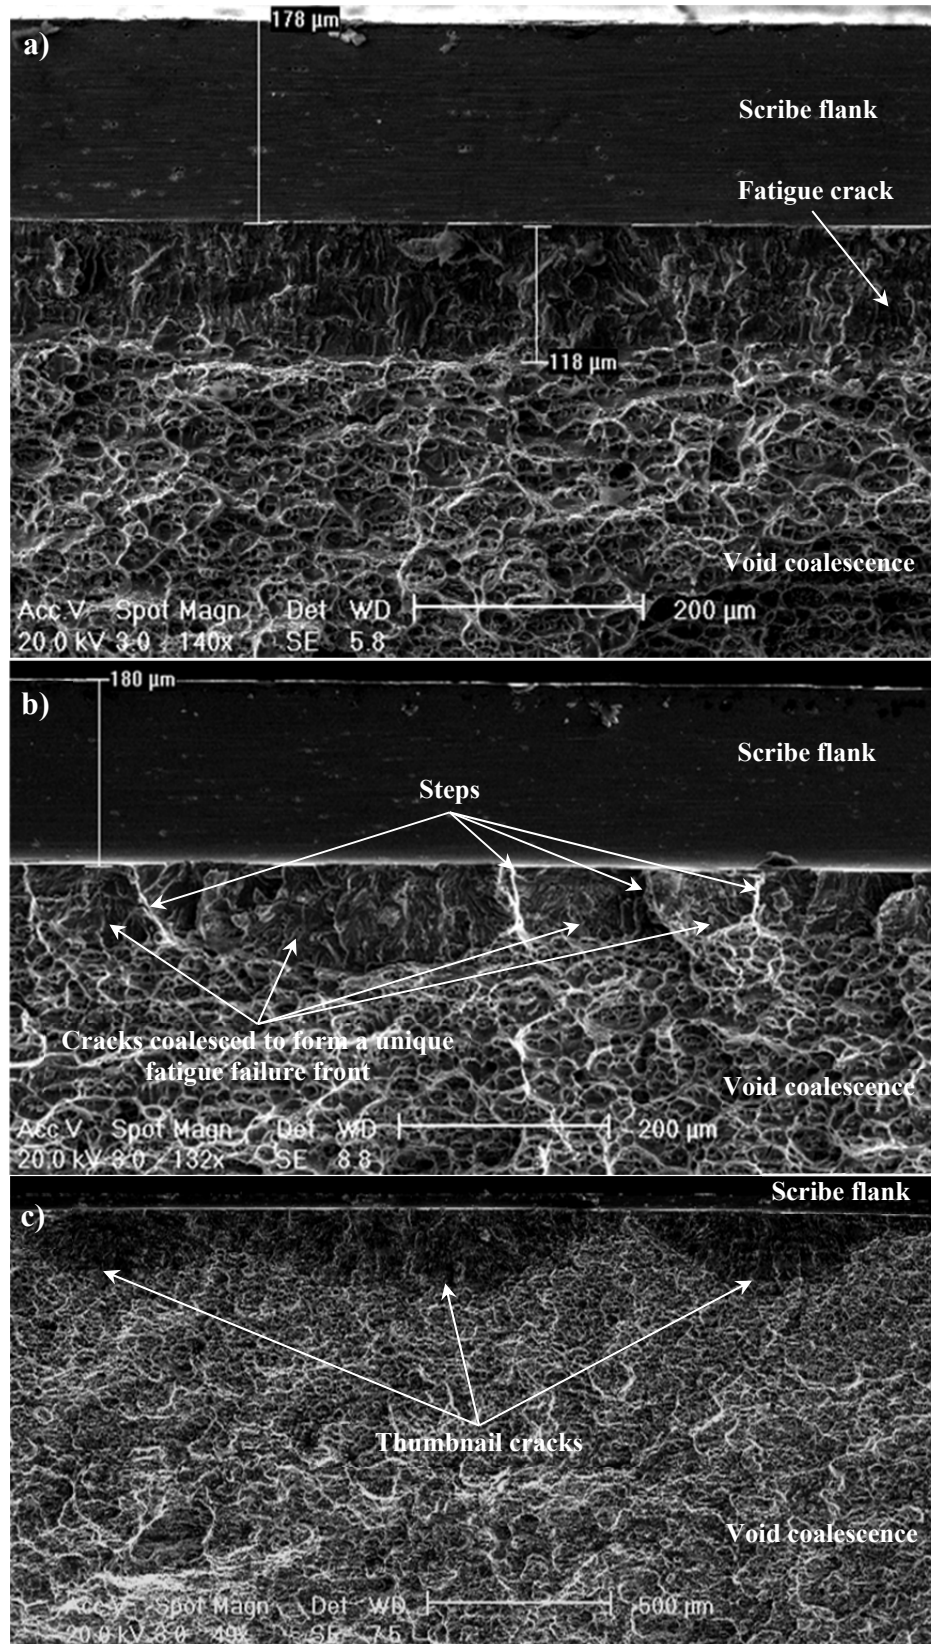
Unique elongated crack front in T-U-185-5 fracture surface (a), elongated fatigue failure front formed by the coalescence of several cracks in T-C-185-50 fracture surface (b) several thumbnail cracks in T-C-50-50 fracture surface (c)
